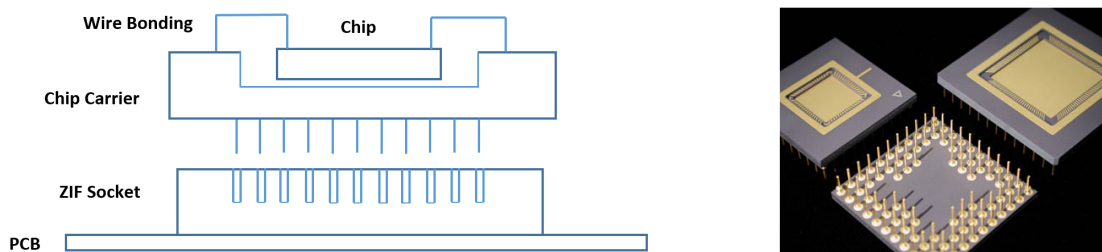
(a) A schematic of the chip assembly (b) A picture of the 84 Pin chip carrier
